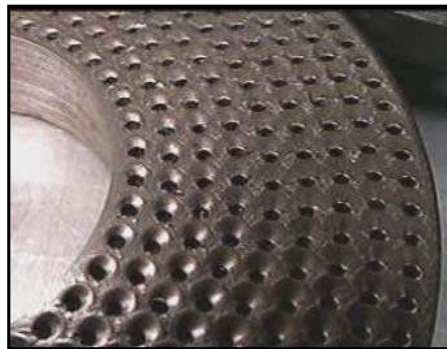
Upper Disk Roughness Using CNC Machine
